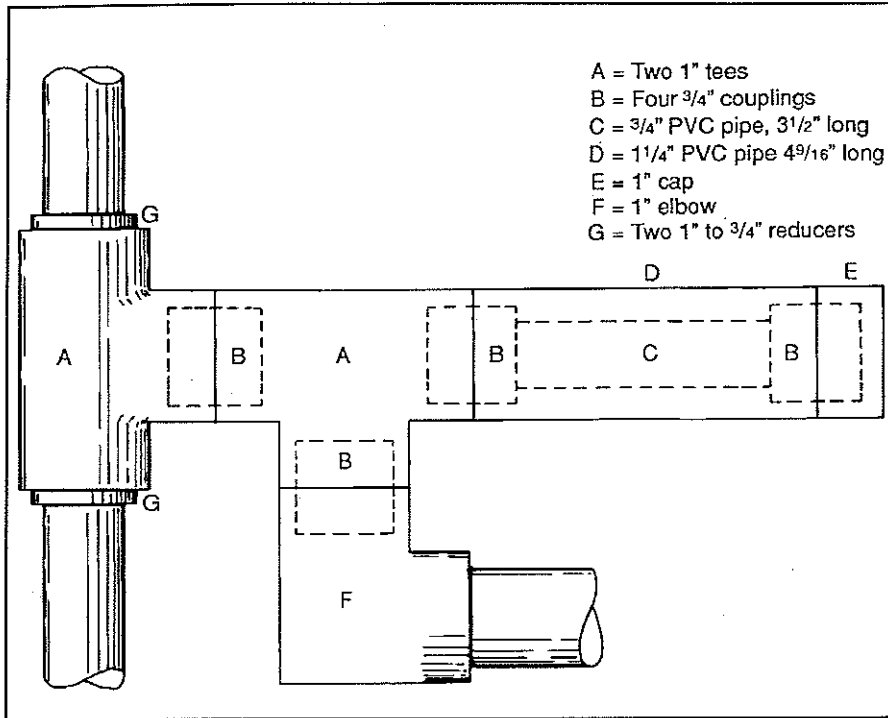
Details of the PVC assembly for the balun and matching section enclosure for the four-element enclosure. The elbow fits into the 1 inch mounting arm.
